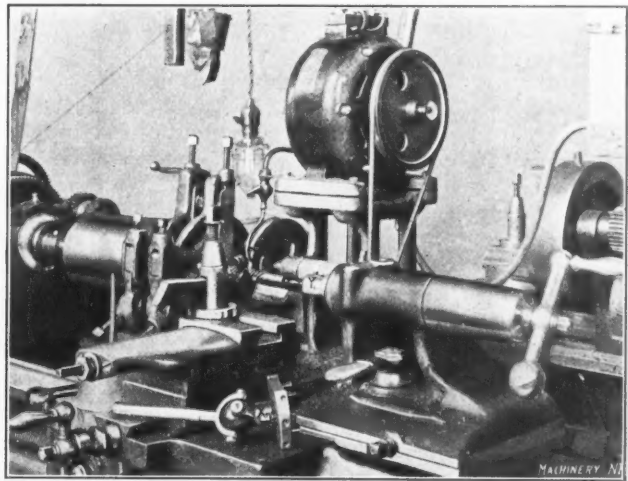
Finish Turning and Grinding the Bowl Spindles
